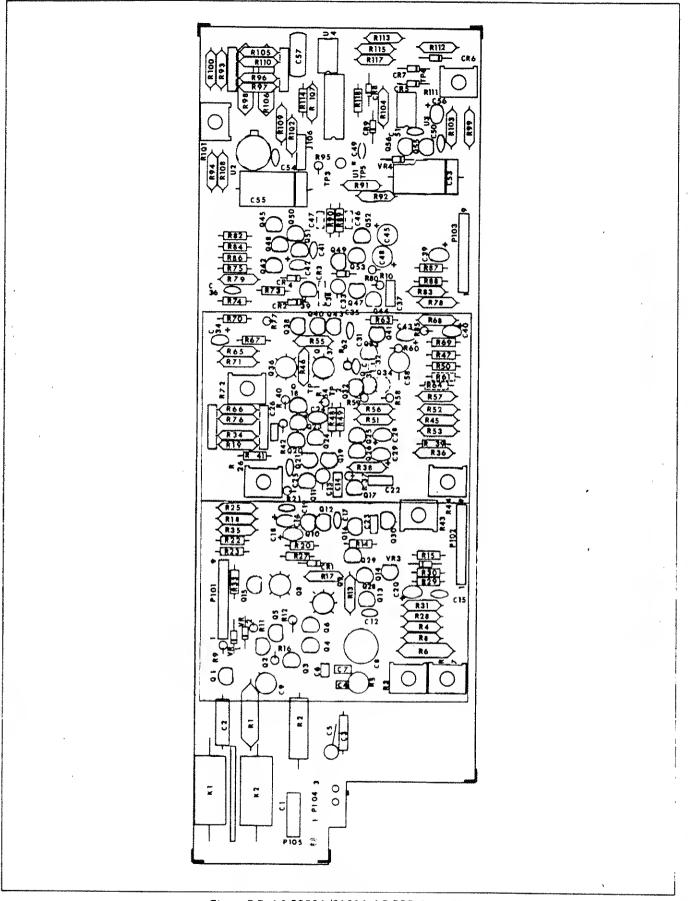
A2 8920A/8921A AC PCB Assembly
